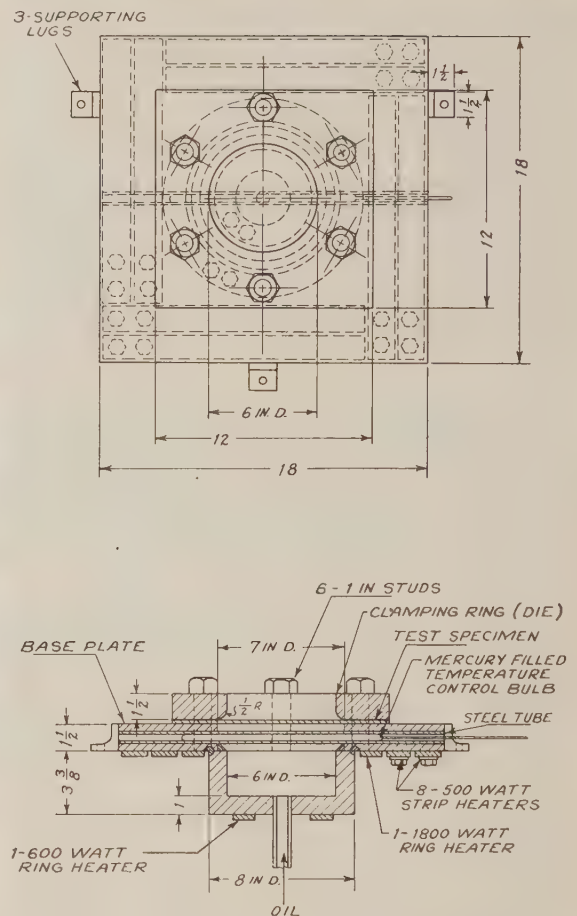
DETAIL OF HOT HYDRAULIC BULGING HEAD
